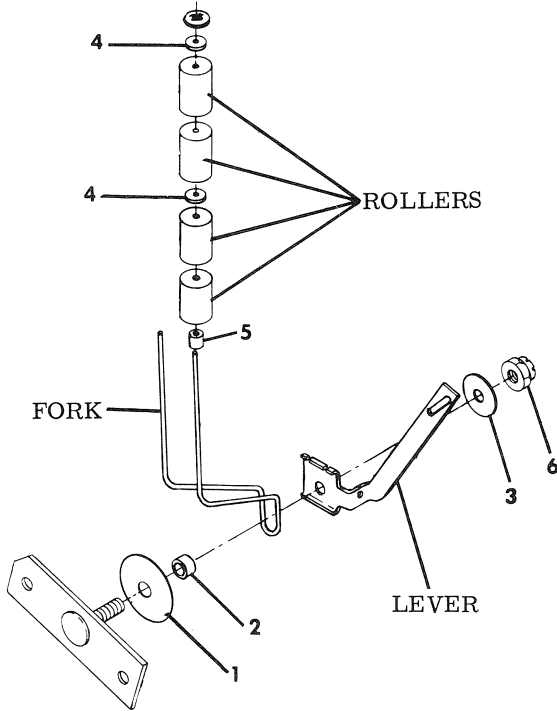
DRIVE BELT SHIFT FORK ASSEMBLY
